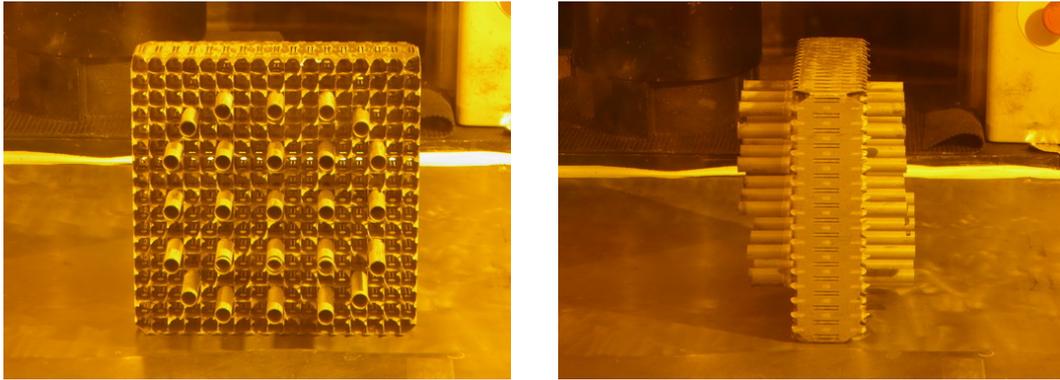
Irradiated spacer grid obtained for the measurement of spring stiffness and dimensional change in a hot cell.
